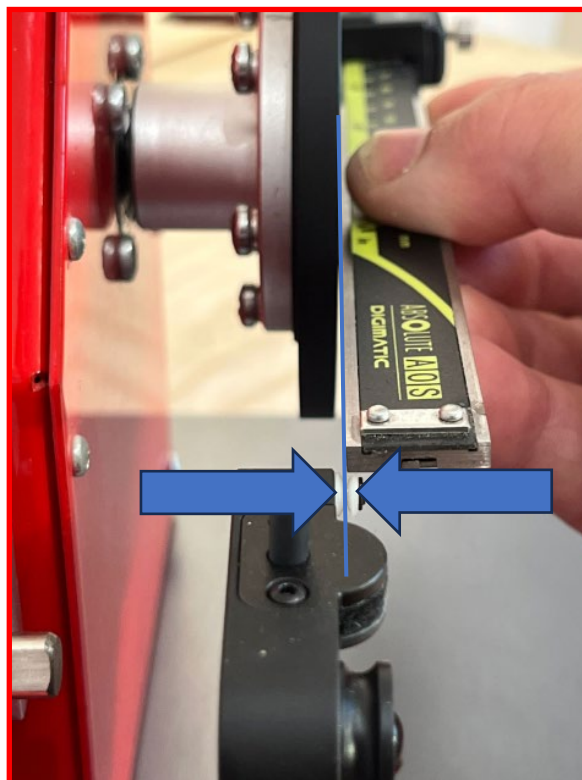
Adjusting offset to align turning plate with the arm wire guide
